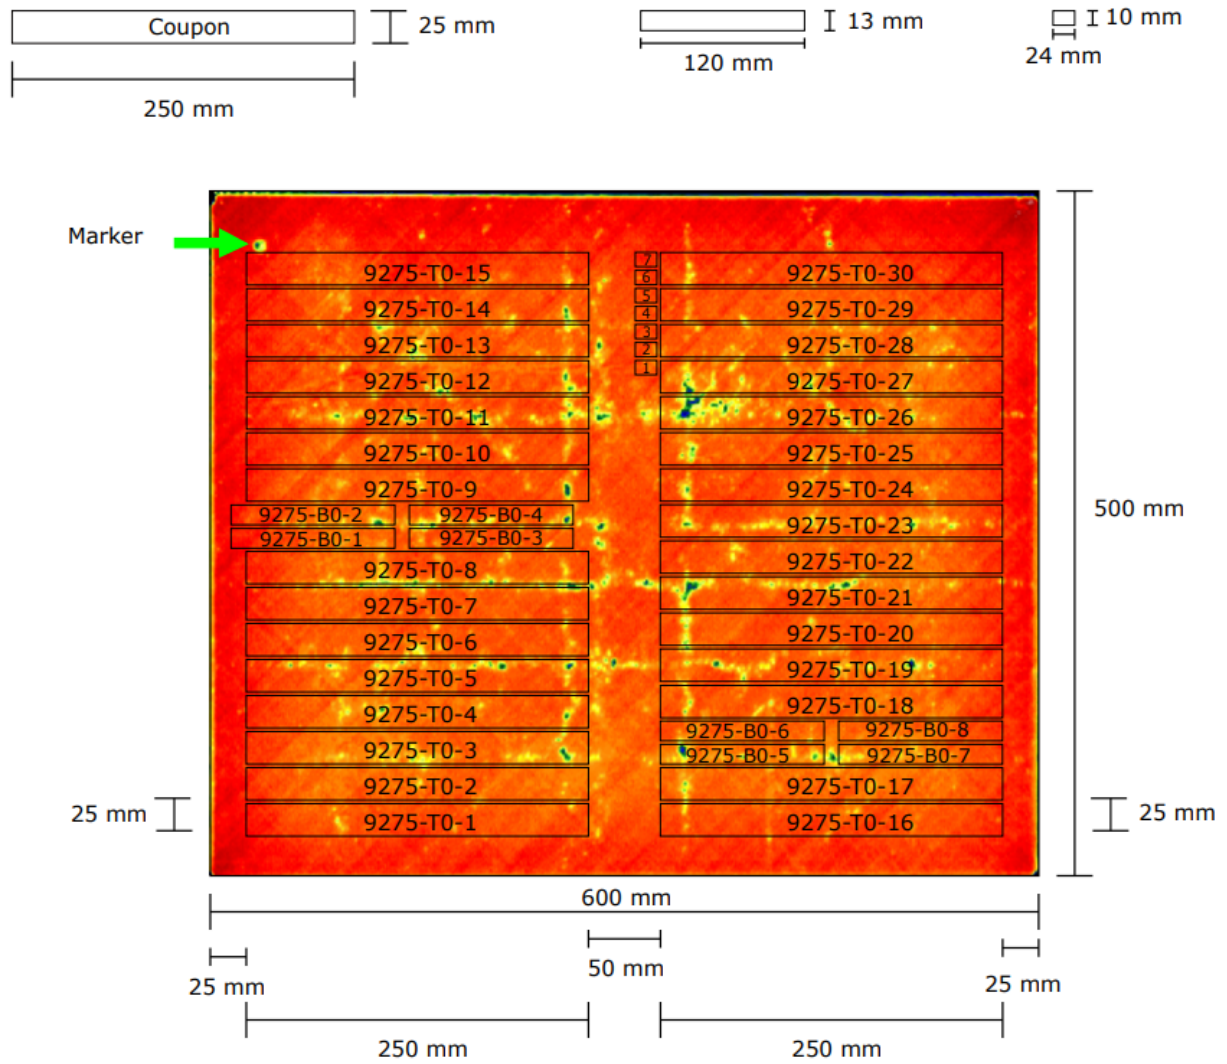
Machining scheme displayed onto the laminate with defects.
